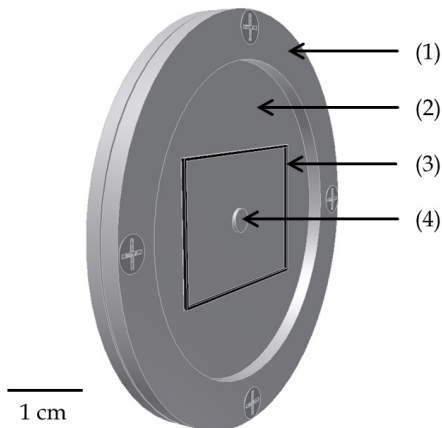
CAD drawing of the aluminum sample casing. (1) screwing cap, (2) aluminum foils, (3) projection of the maximal beam dimensions (black line) at the PGAA station at the BRR and (4) deepening in which the sample is mounted.
